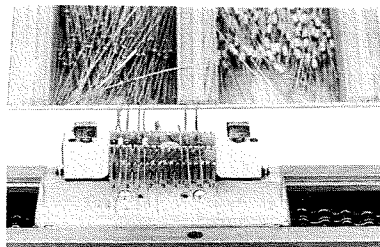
Left: Assembly jig on production line. Embryonic module is passing a bin of components during assembly. Below: assembly jig used during engineering development work.
